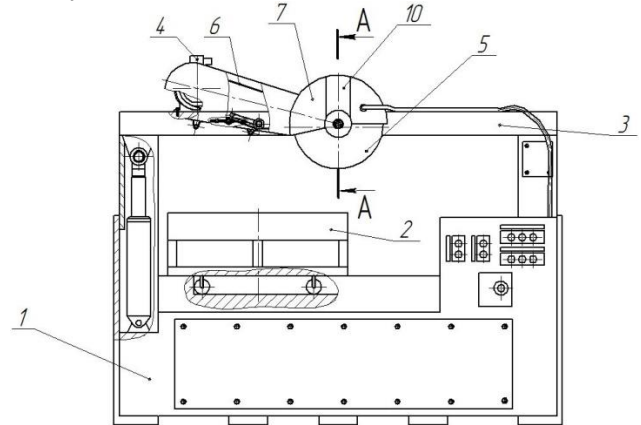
Cutting machine with tracking system: 1 – beds; 2 – work table; 3 – upper part of the frame; 4 – engine; 5 – working body; 6 – belt drive; 7 – protective casing.
